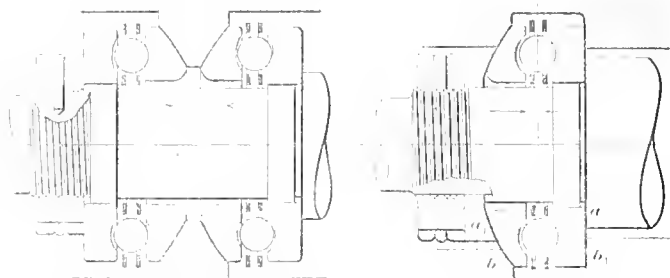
Thrust Load in Two Directions on Two Collar Bearings.
